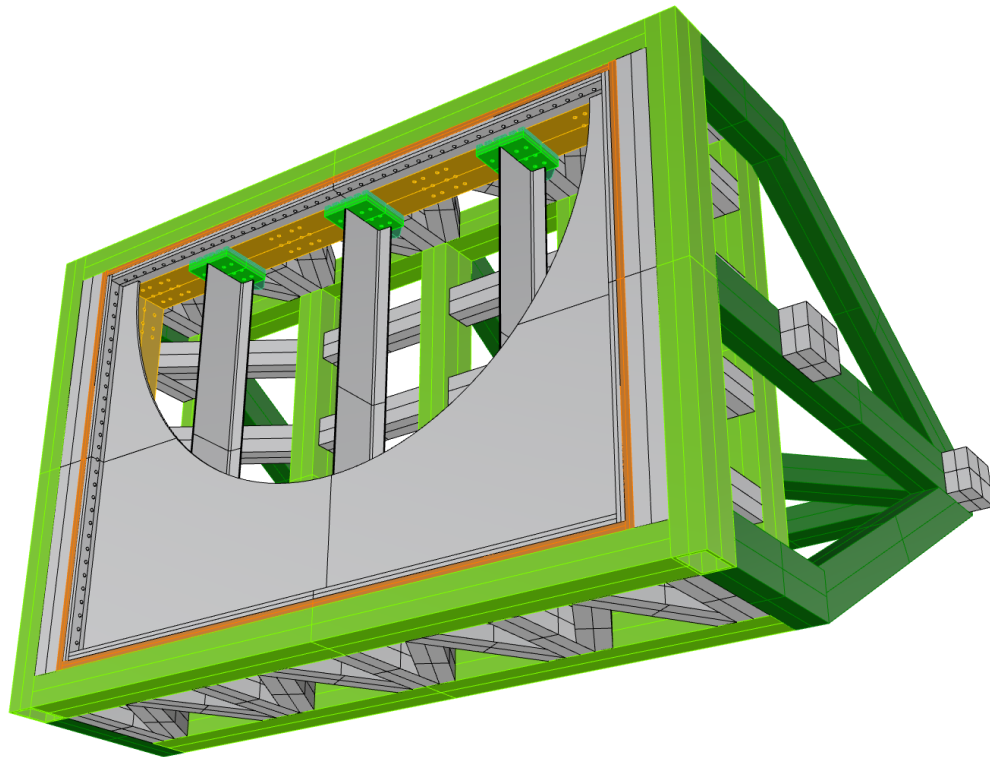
Cutaway view showing the fitted panel. Note how stiffener end plates and the perimeter bar align with the bolt holes in the ringframe of the carriage.
